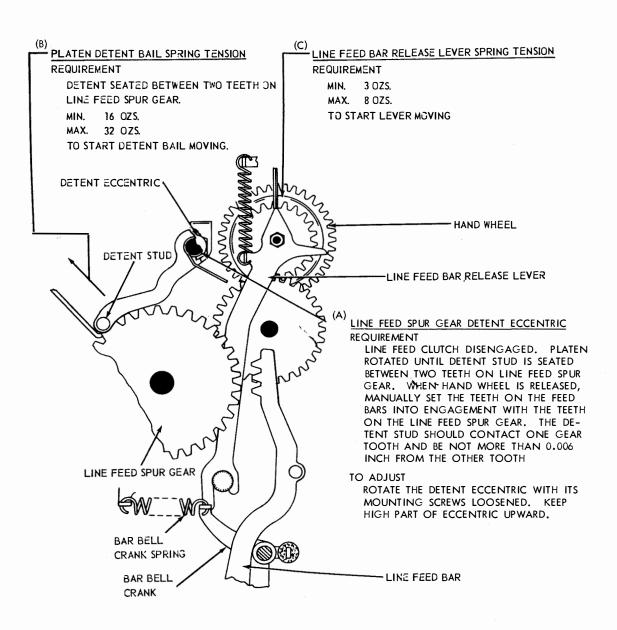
TYPING UNIT, LINE FEED MECHANISM, RIGHT SIDE VIEW
